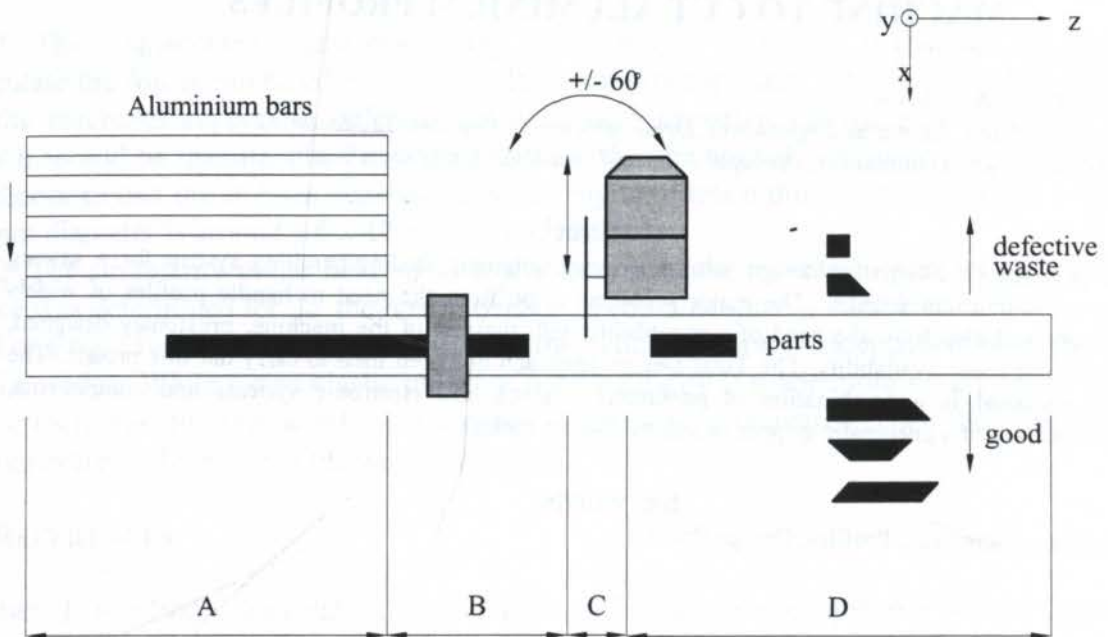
Basic layout of the Sawing Machine. A-Loading; B-Orientation and Pre-Feeding (500mm); C-Cutting; D-Feeding and Separation.
